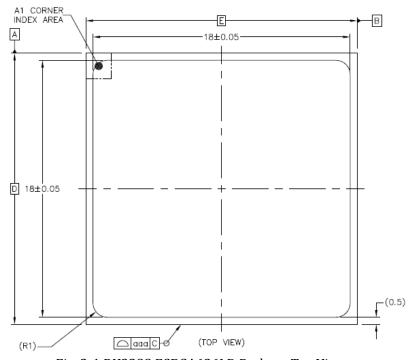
RK3288 FCBGA636LD Package Top View
